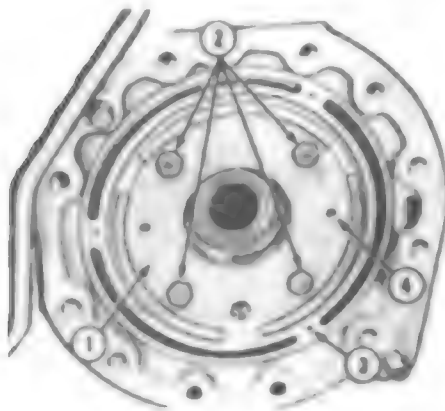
View showing screw holes for removing the brake piston and jack screw holes for removing carrier. Refer to test.
